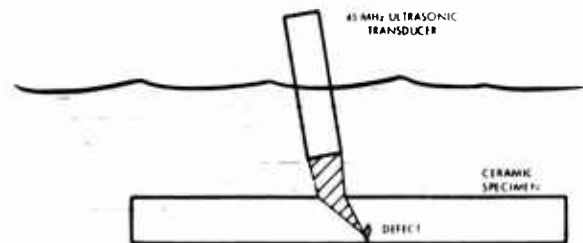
Pulse-echo shear wave inspection is performed using the same equipment, but with the transducer tilted at an angle of about 11° to the surface. This technique is more sensitive to defects oriented normal to the surface.
